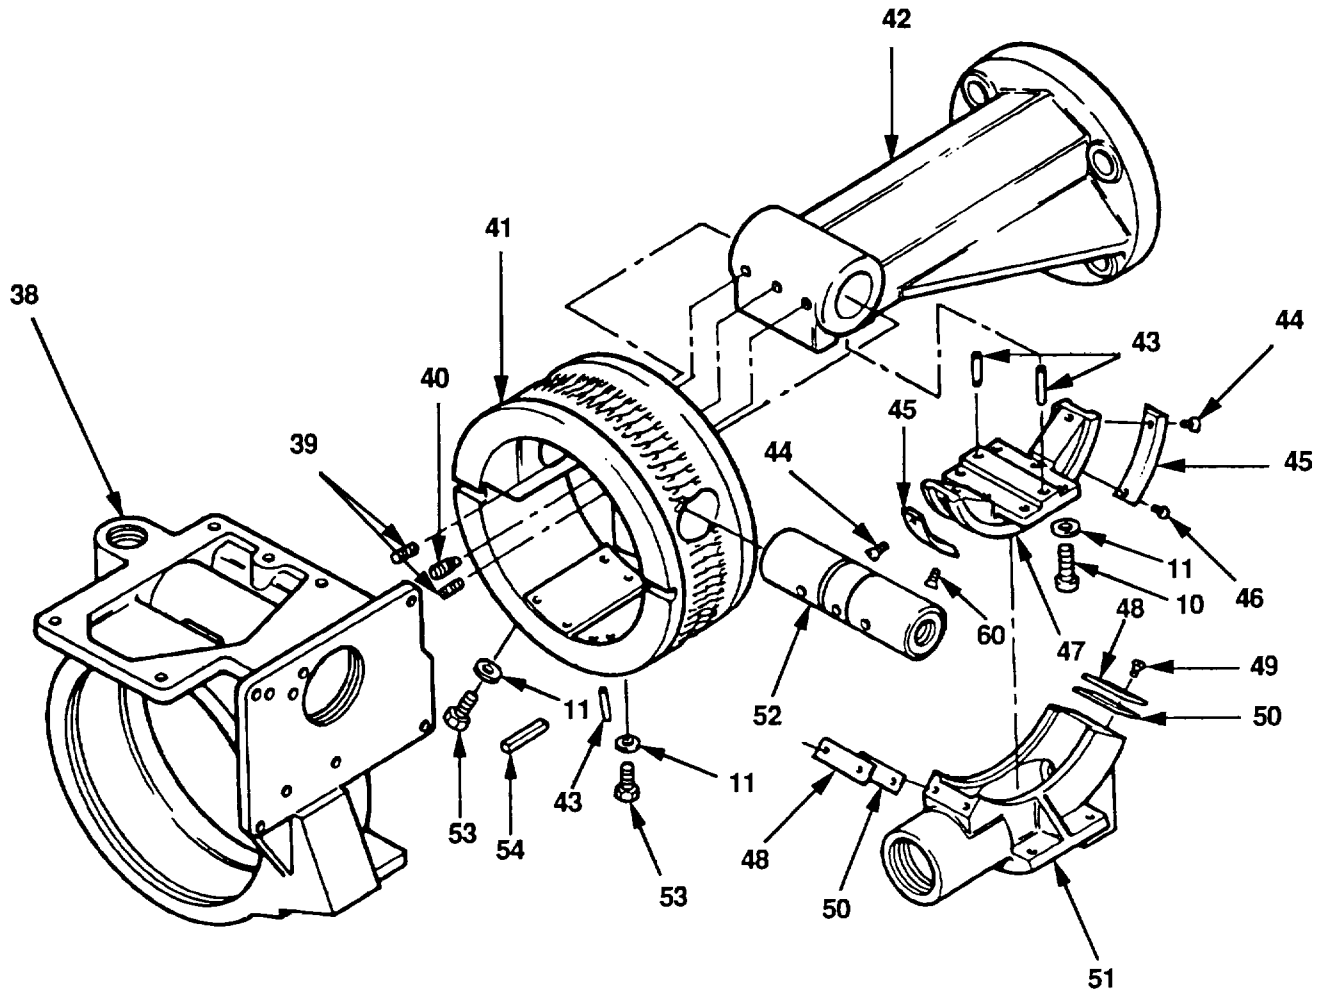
Mount Subassembly, Telescope, Lower Assembly 8572222
